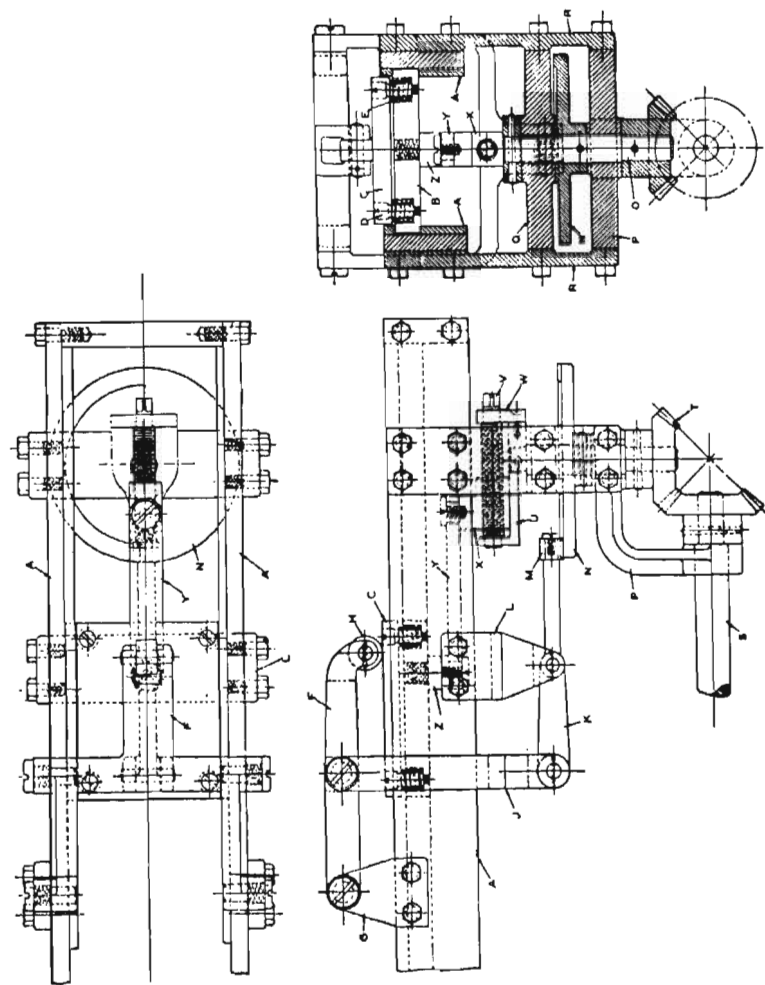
Strip Stock Feeding Mechanism with Means for Adjusting Stroke.
